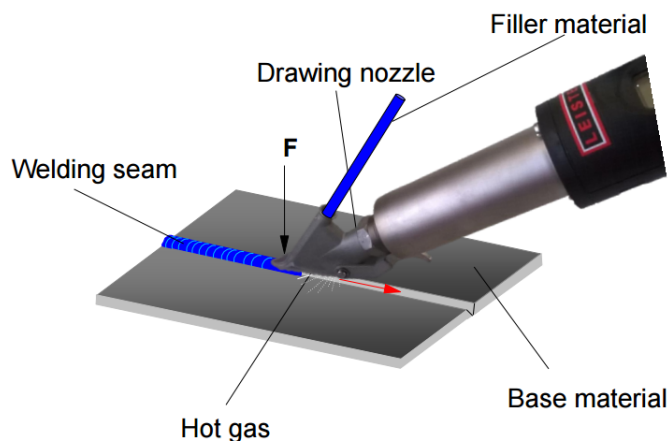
This diagram shows how hot gas welding works. The filler material (welding rod) is fed through the nozzle into the seam created by tacking, in order to form a watertight seal
